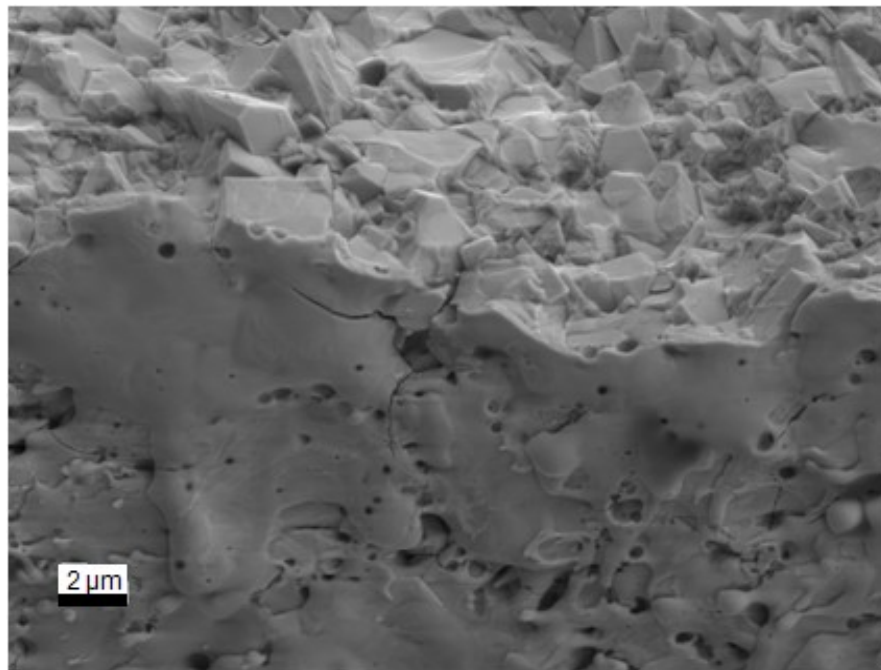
Detail of fracture surface as marked in Fig. 79 showing the origin of fracture being a coalescence of EDM-induced microcracks
